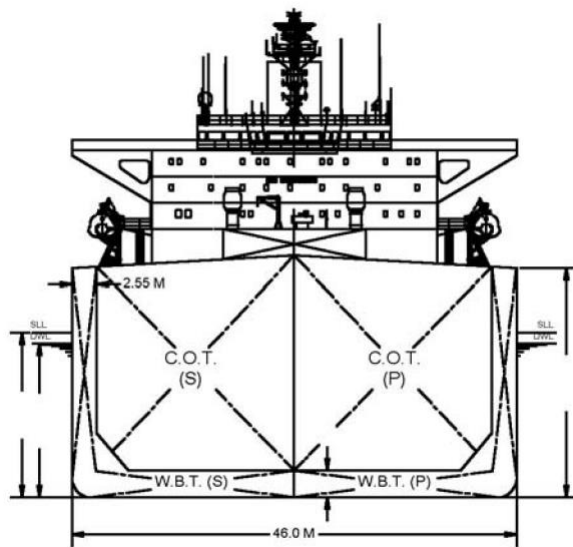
Example of a new build FPSO tank structures cross section.
